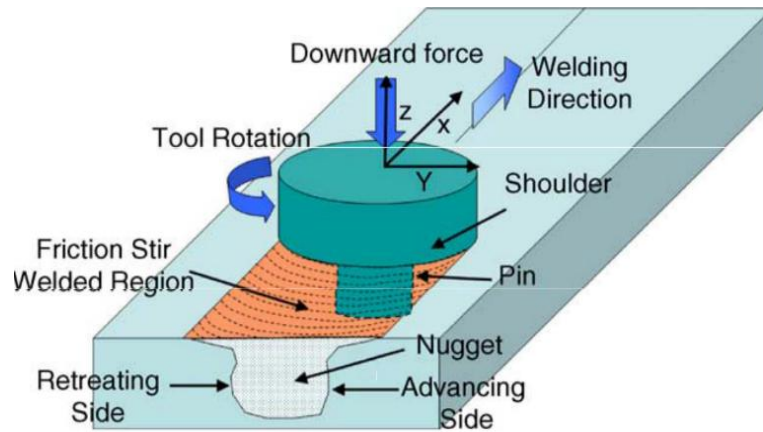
Schematic Diagram of Friction Stir Welding <sup>[4]</sup>
